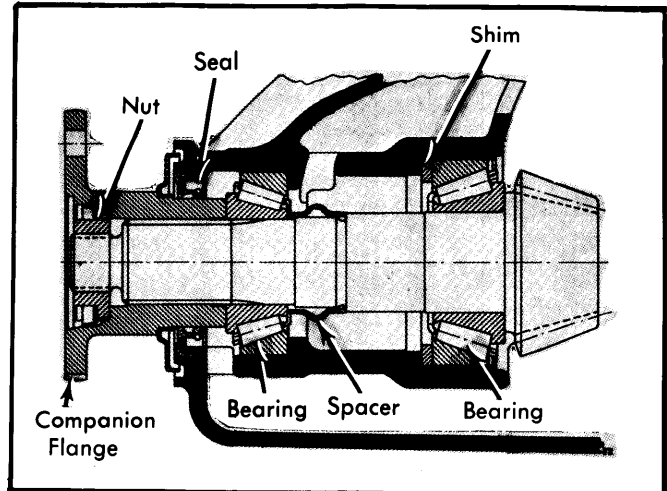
Sectional View of Drive Pinion Gear Assembly
